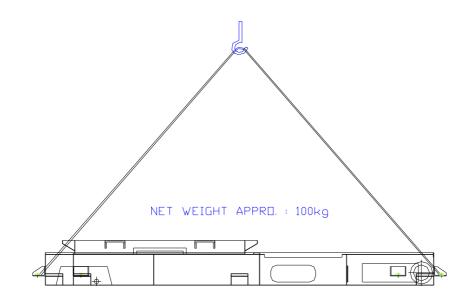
HANGING OF FRONT COOLANT TANK
